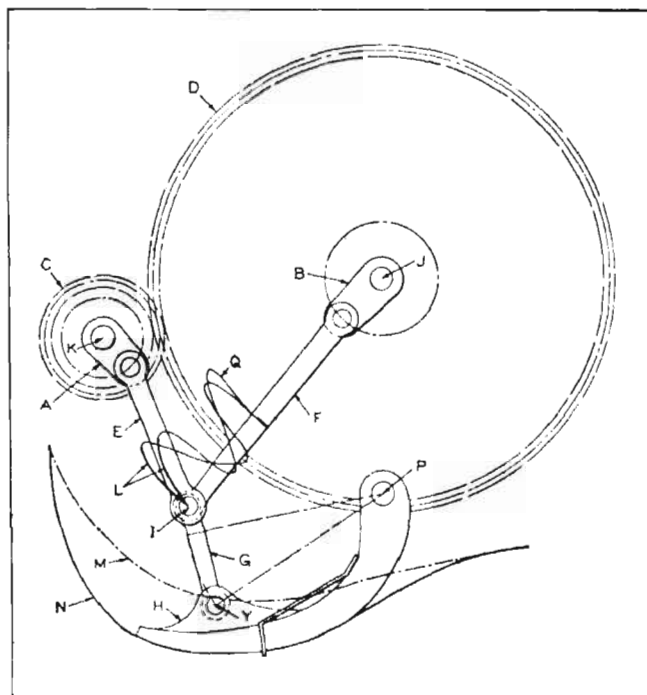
Double-crank Link and Gear Mechanism for Indexing Motion Picture Film.
